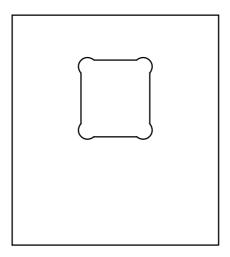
Adapter for small specimens of the size shown in Figure 3b)
